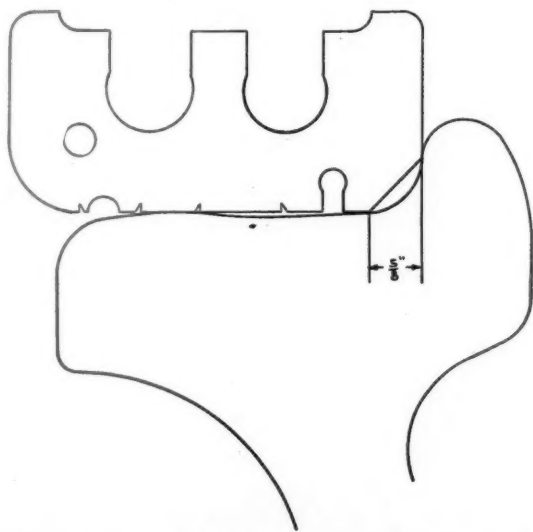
A—Method of gaging brake burn transverse cracks extending into the throat of the flange of a cast iron wheel. See Rule 75
